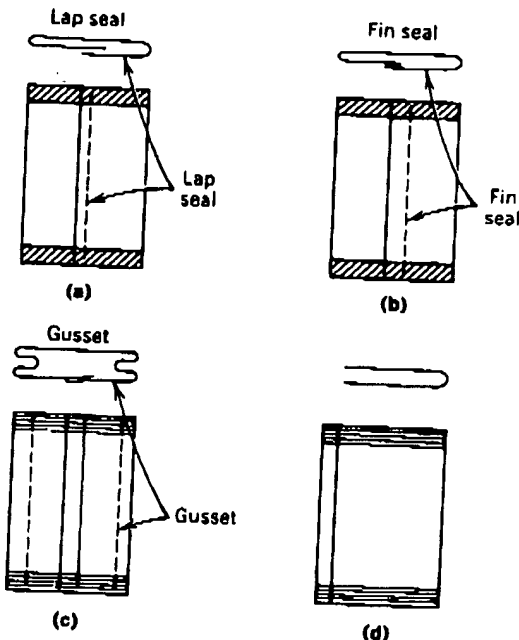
Selected package styles on VFFS machinery. (a) and (b), Pillow style; (c), gusseted style; (d) three-sided seal.
